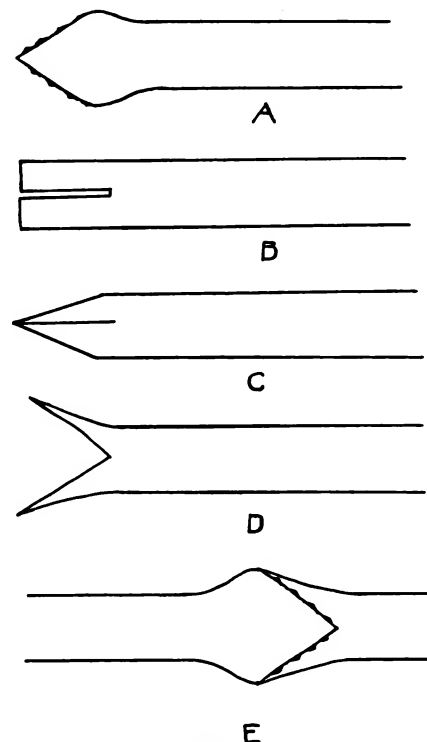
BOTH ENDS ARE UPSET AND PREPARED FOR WELDING
